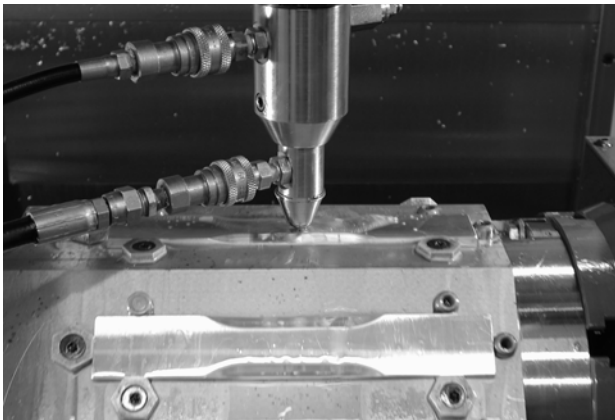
A set of 8 thick section specimens being LPB processed in a 4-axis CNC milling machine.
